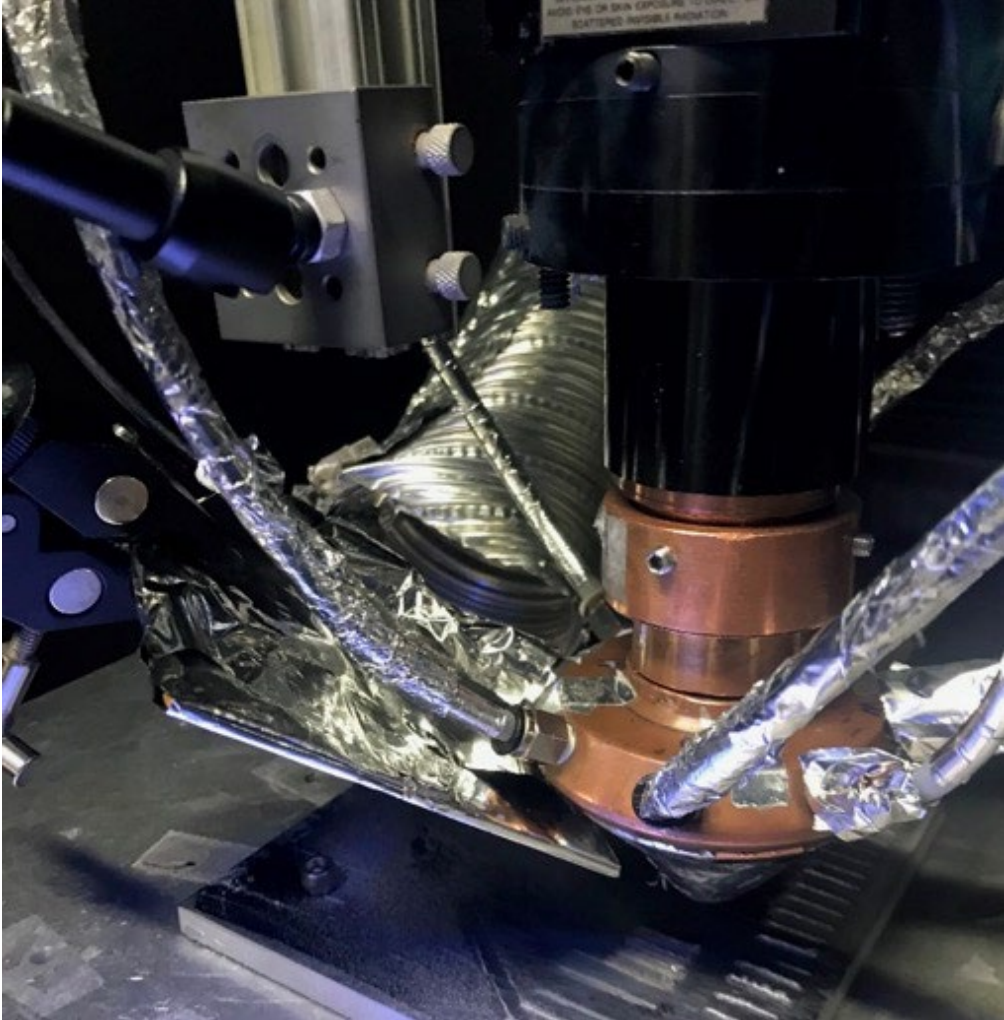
Experiment setup, a view of DMD nozzle and some printed stripes.
